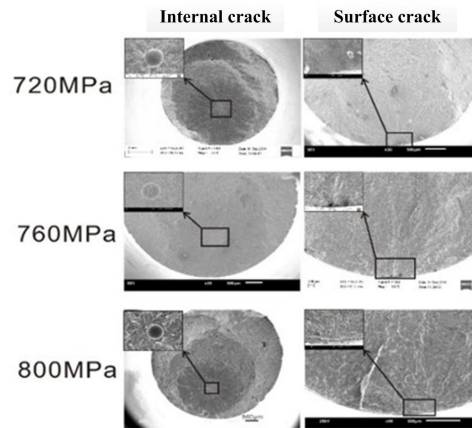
Typical fracture surfaces of specimens with internal crack initiation and specimens with crack initiating from surface under three stress levels.
